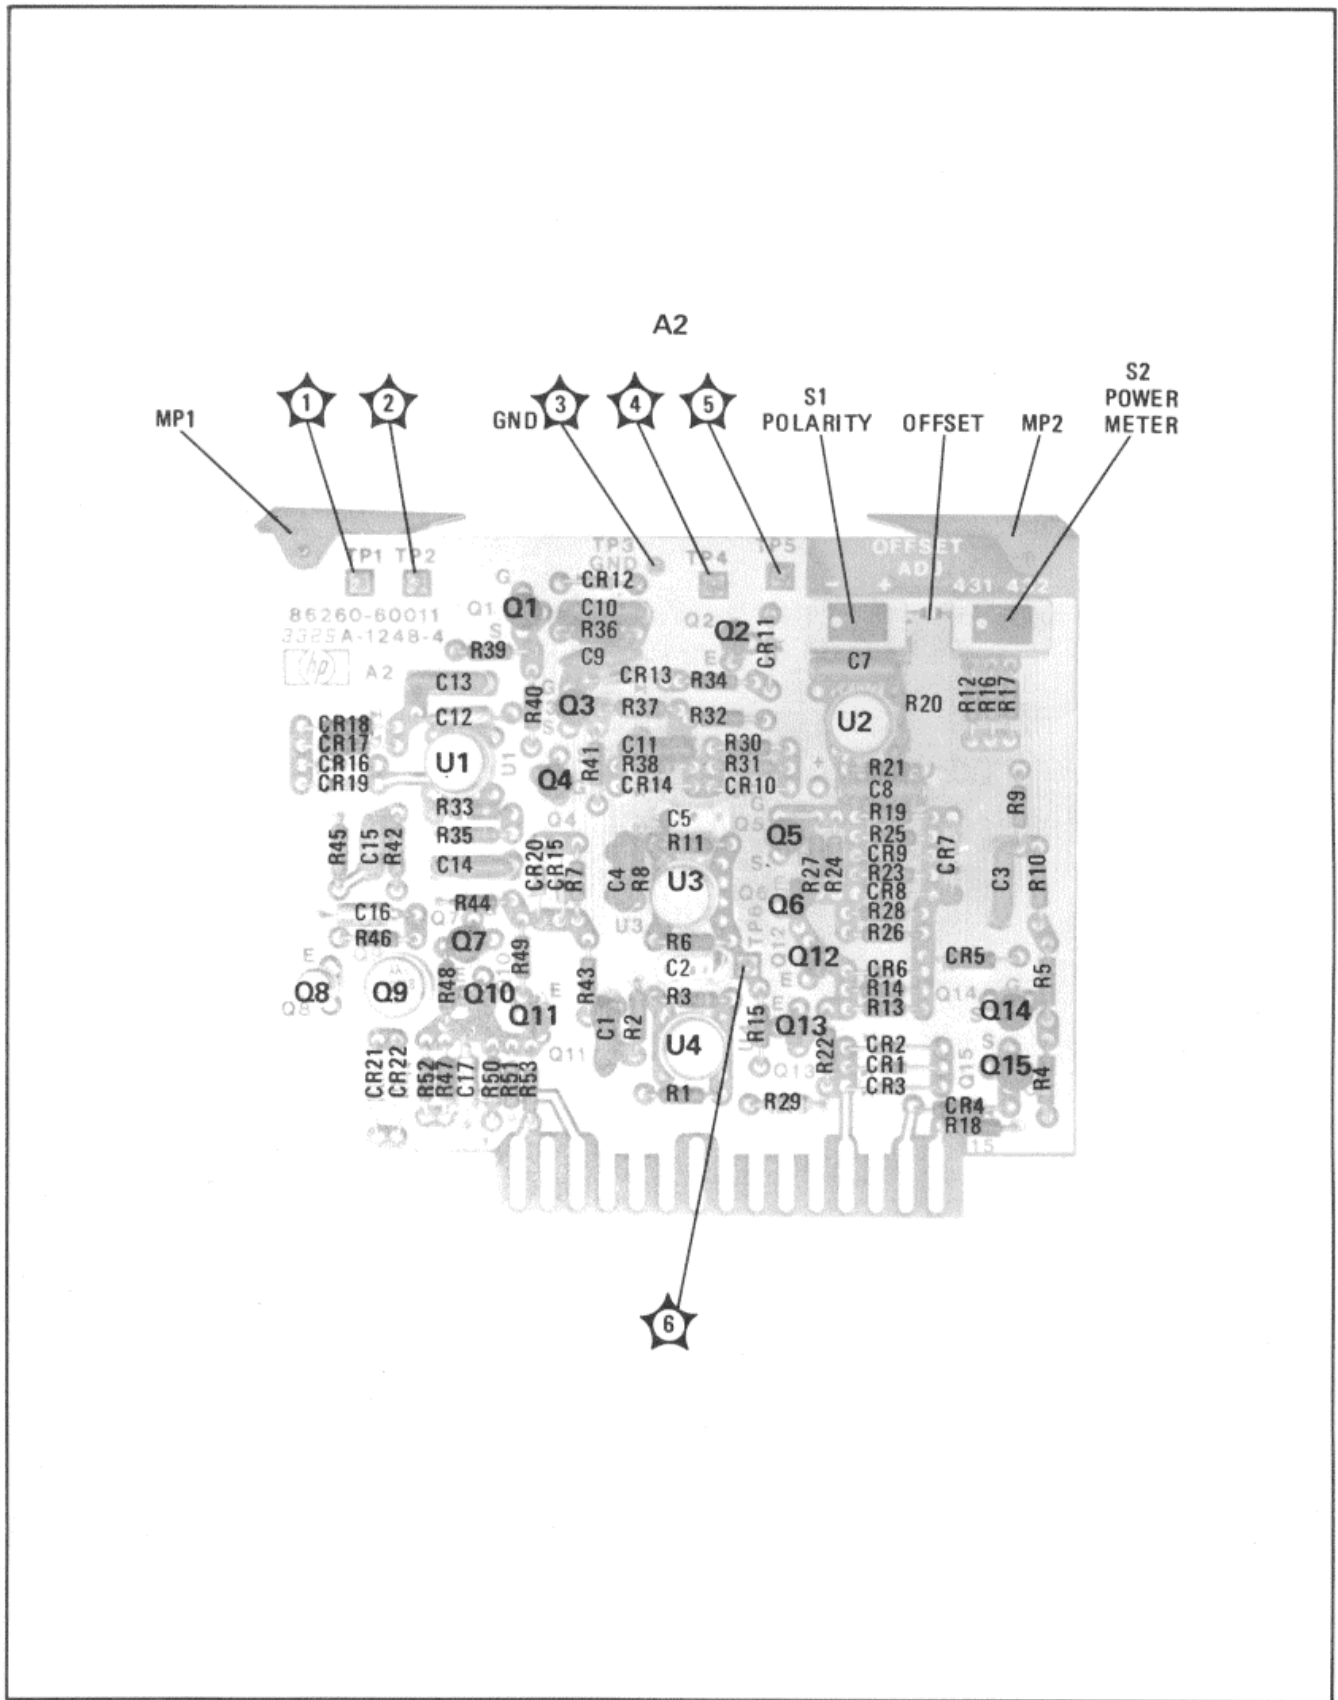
A2 ALC Assembly, Components Location 8-14
